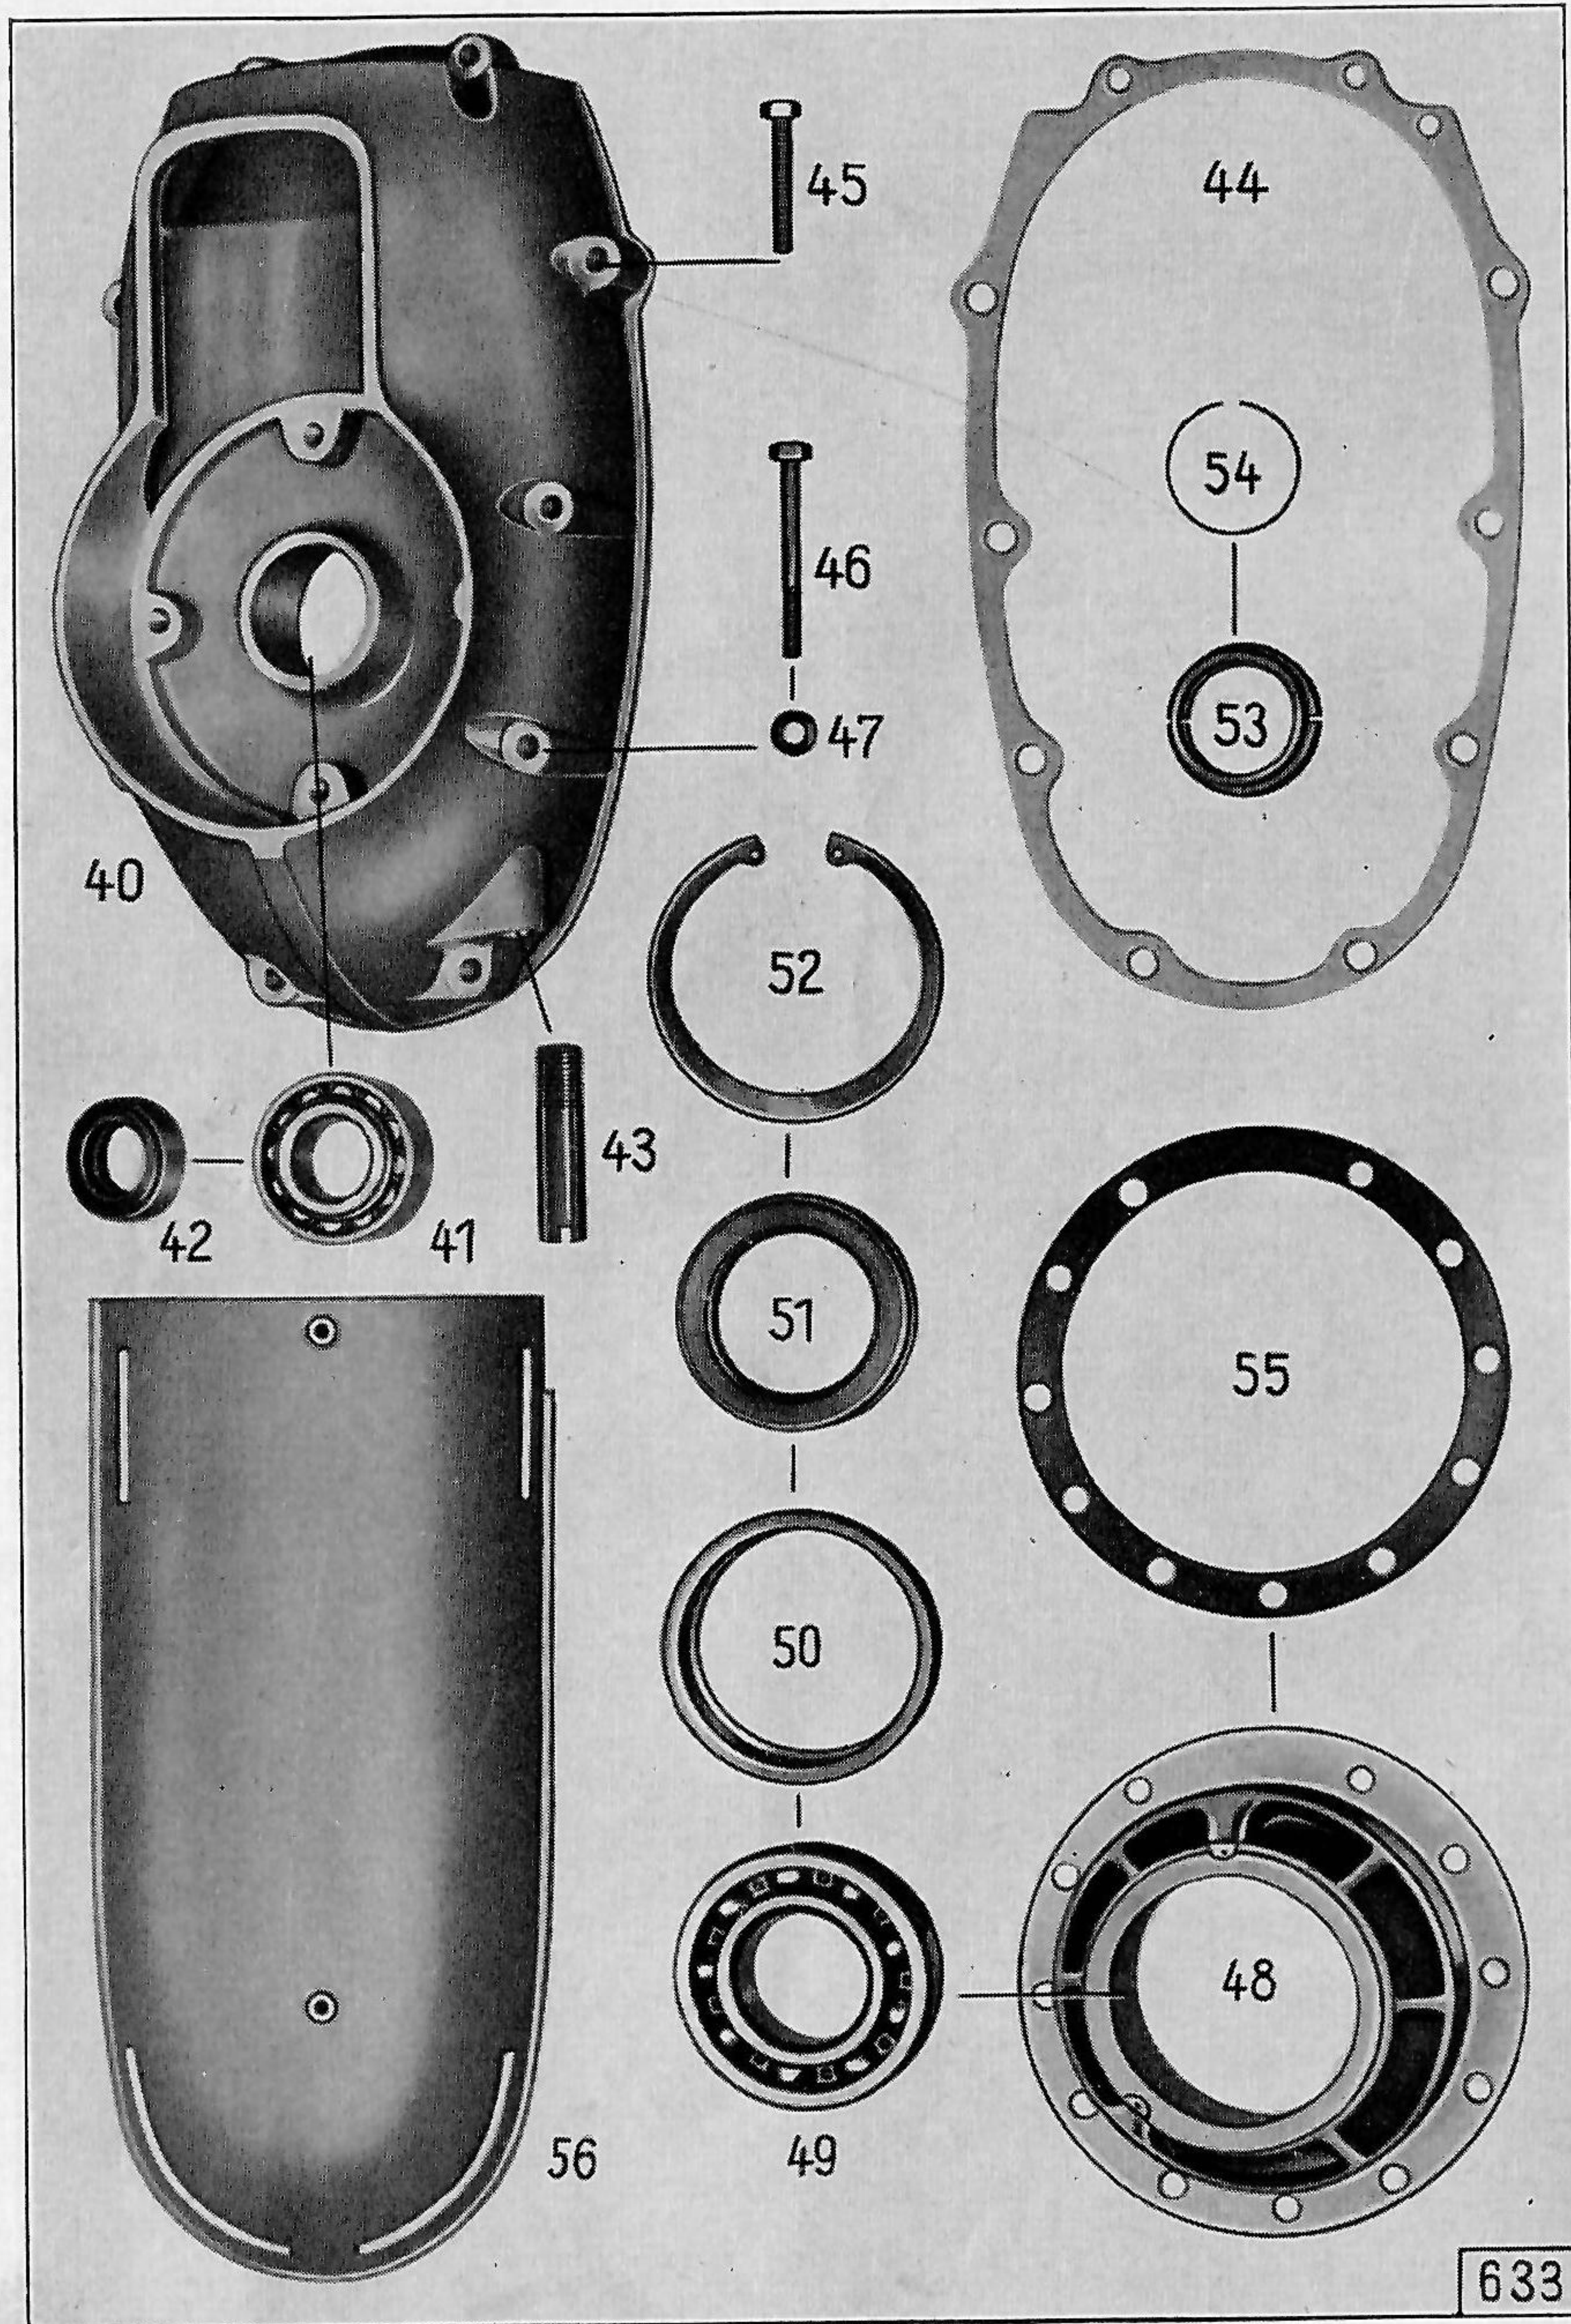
, Group M: b) Housing and Cylinders, Crankcase Cover, Housing Cap
